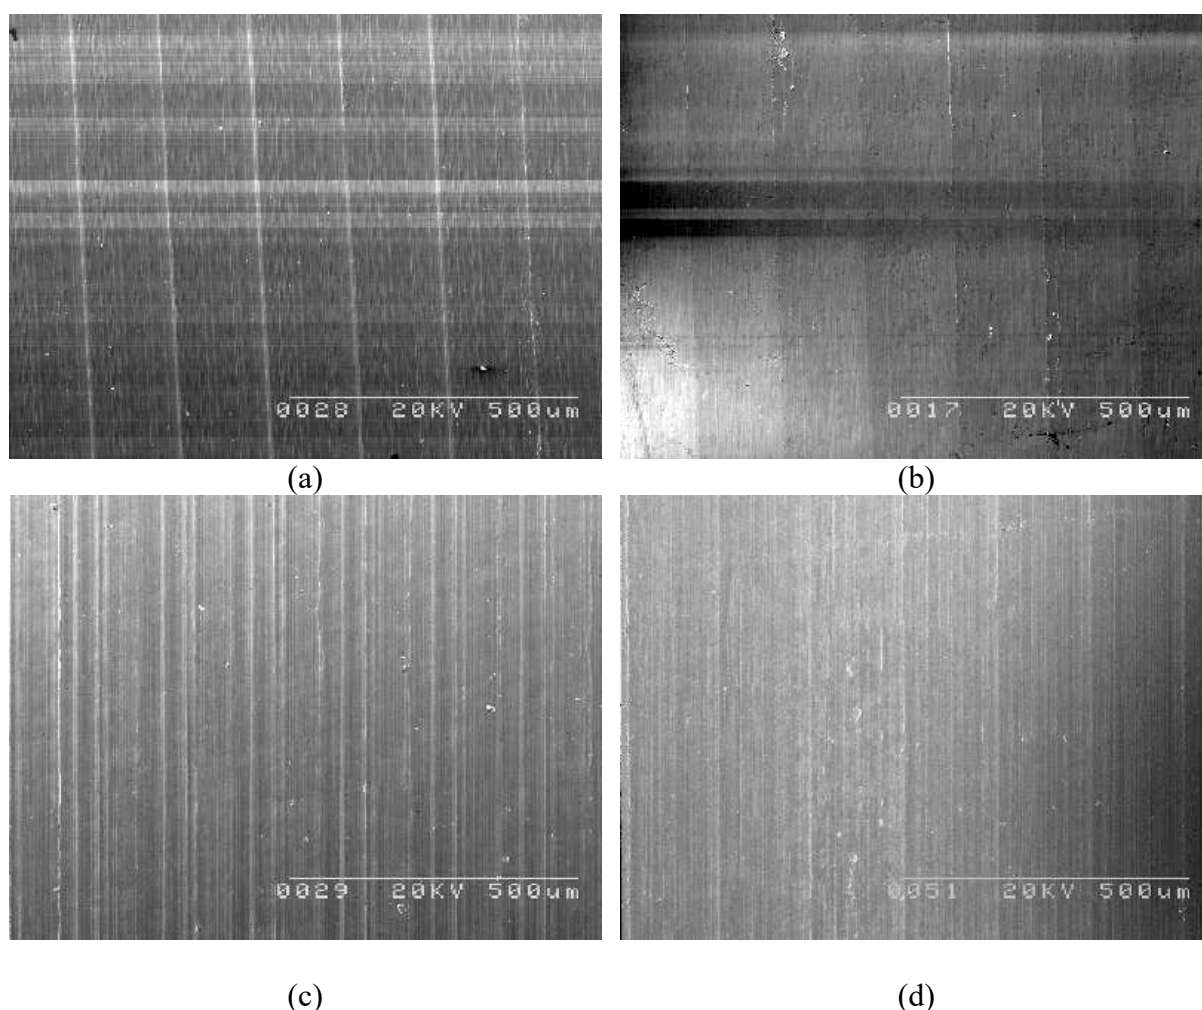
Surfaces generated after machining with coated carbide T4 tool with (a) conventional coolant supply, (b) in argon enriched environment, (c) coolant pressure of 11 MPa and (d) 20.3 MPa at a cutting speed of 120 m min^{-1} .
